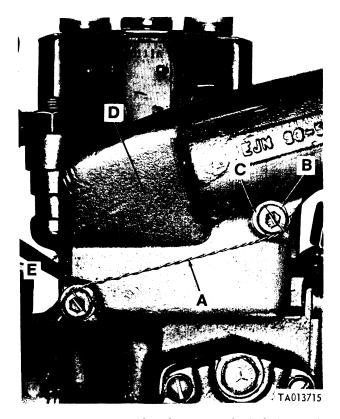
Removing solenoid cover assemby (code A pumps).
